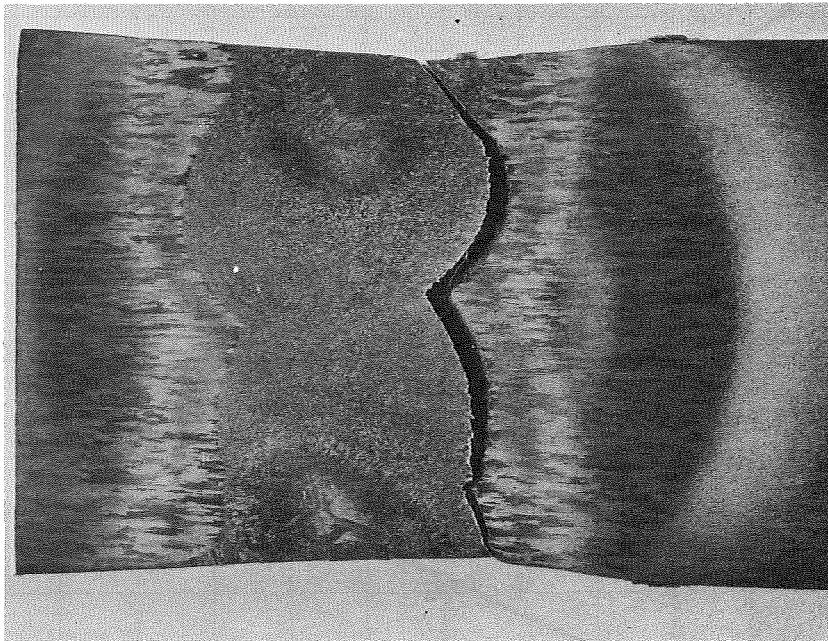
Macrosection through the Center of an Al 2021-T81 Welded Tension Specimen
